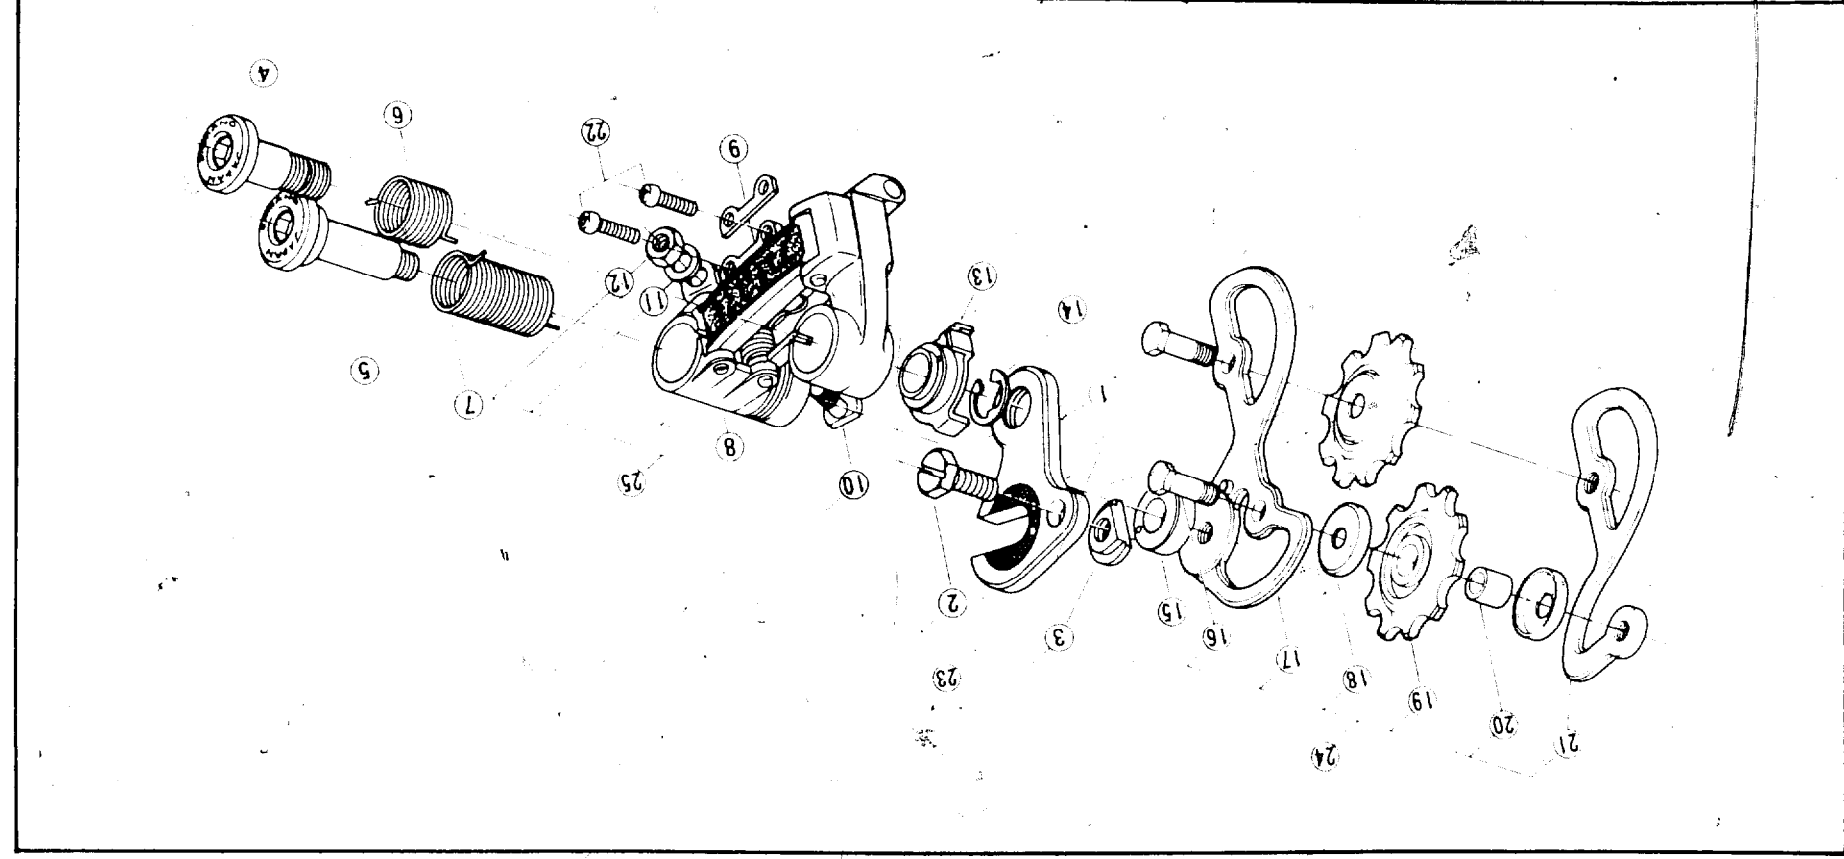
Shimano Tiltist rear derailleur. Parts are: (1) adapter, (2) adapter screw, (3) adapter nut, (4) adapter mounting bolt, (5) plate mounting bolt, (6) B-tension spring, (7) P-tension spring, (8) mechanism assembly, (9) adjusting plate, (10) cable fixing bolt, (11) cable fixing washer, (12) cable fixing nut, (13) adapter bushing, (14) stop ring, (15) plate bushing, (16) pulley bolt, (17) inner cage plate, (18) pulley cap, (19) pulley, (20) pulley bushing, (21) outer cage plate, (22) adjusting screw, (23) adapter screw and nut, (24) pulley plate assembly, and (25) cable fixing set.
